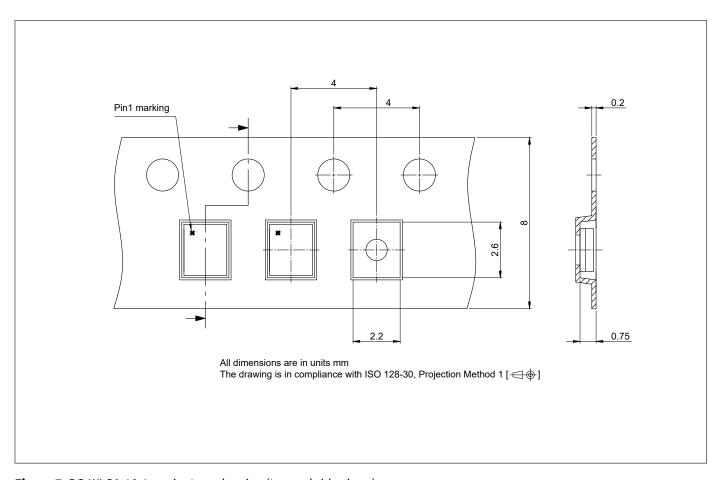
PG-WLGA-18-1 carrier tape drawing (top and side views)
